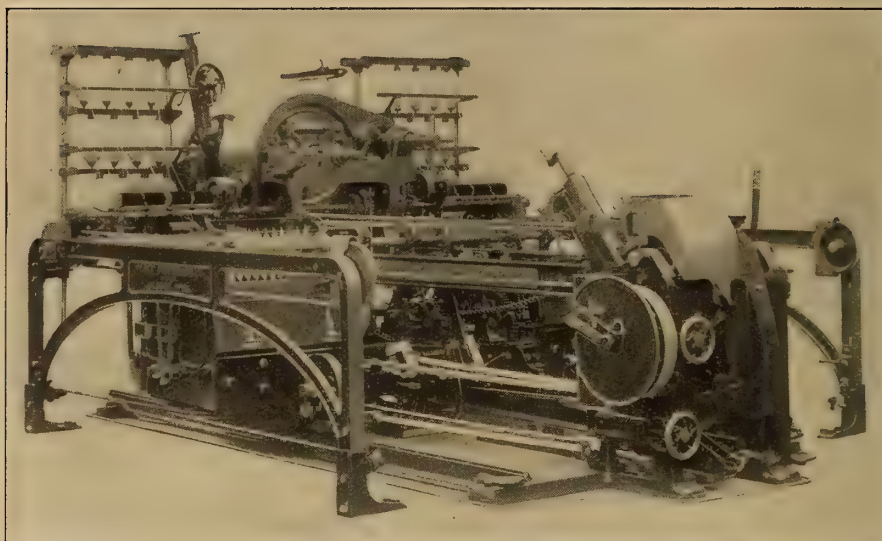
HEADSTOCK AND SELF-ACTING MULE. PLATT BROS. CO., LTD., OLDHAM
